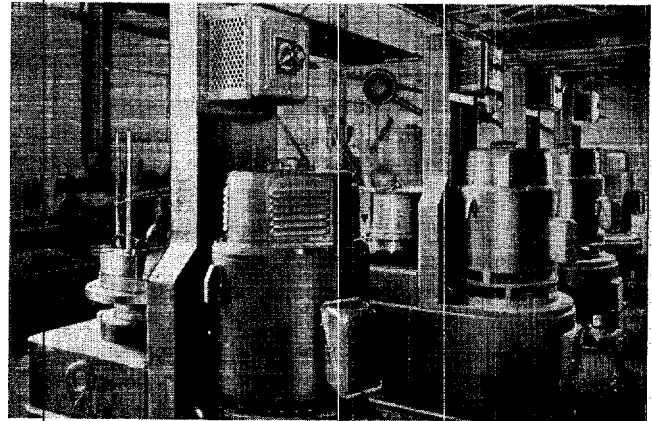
Test assembly of shunt-field controlled wire-drawing machinery with 30/40-hp dc motors.
